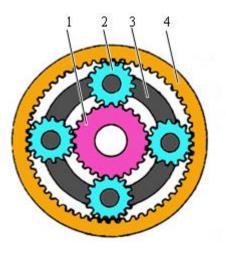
1 Sun gear 2 Planetary gear 3 Planetary carrier 4 Ring gear
